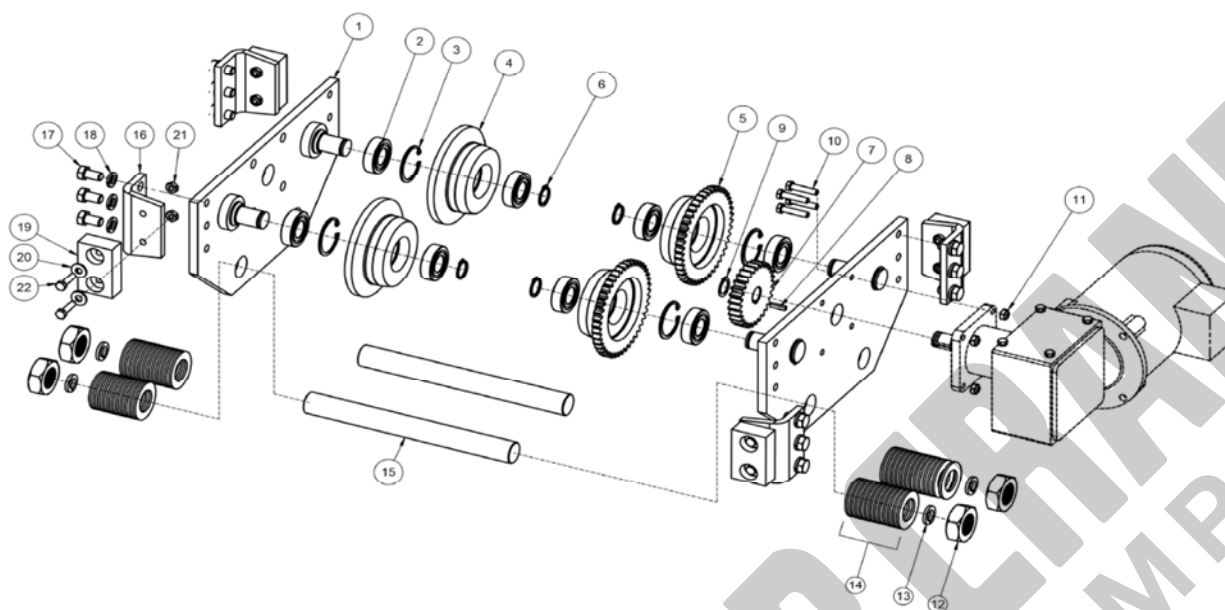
Trolley Frame and Wheel Assembly One Motor 4"0 Wheels (6" c/c Pins)
